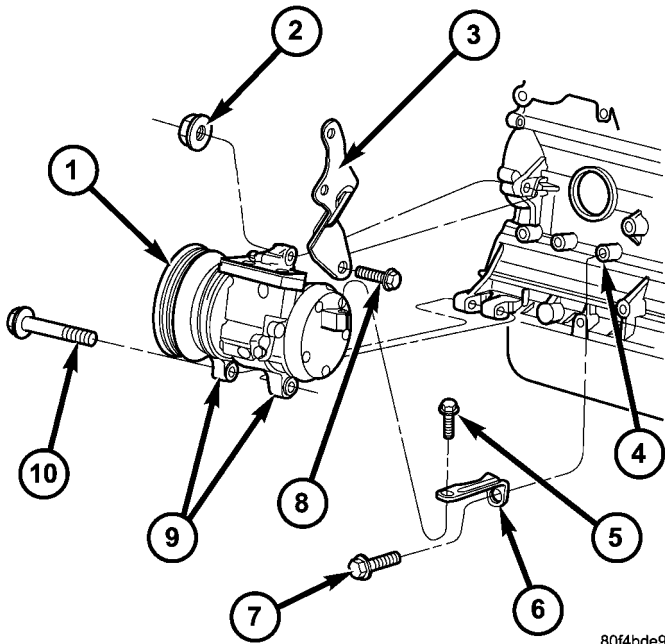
A/C Compressor and Brackets - 4.0L Engine
